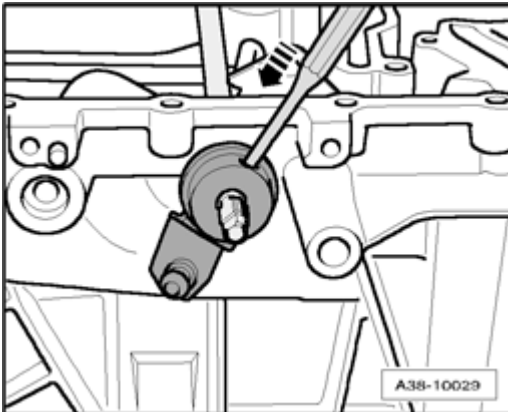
Driving Out Roll Pin For Transmission Selector Lever
